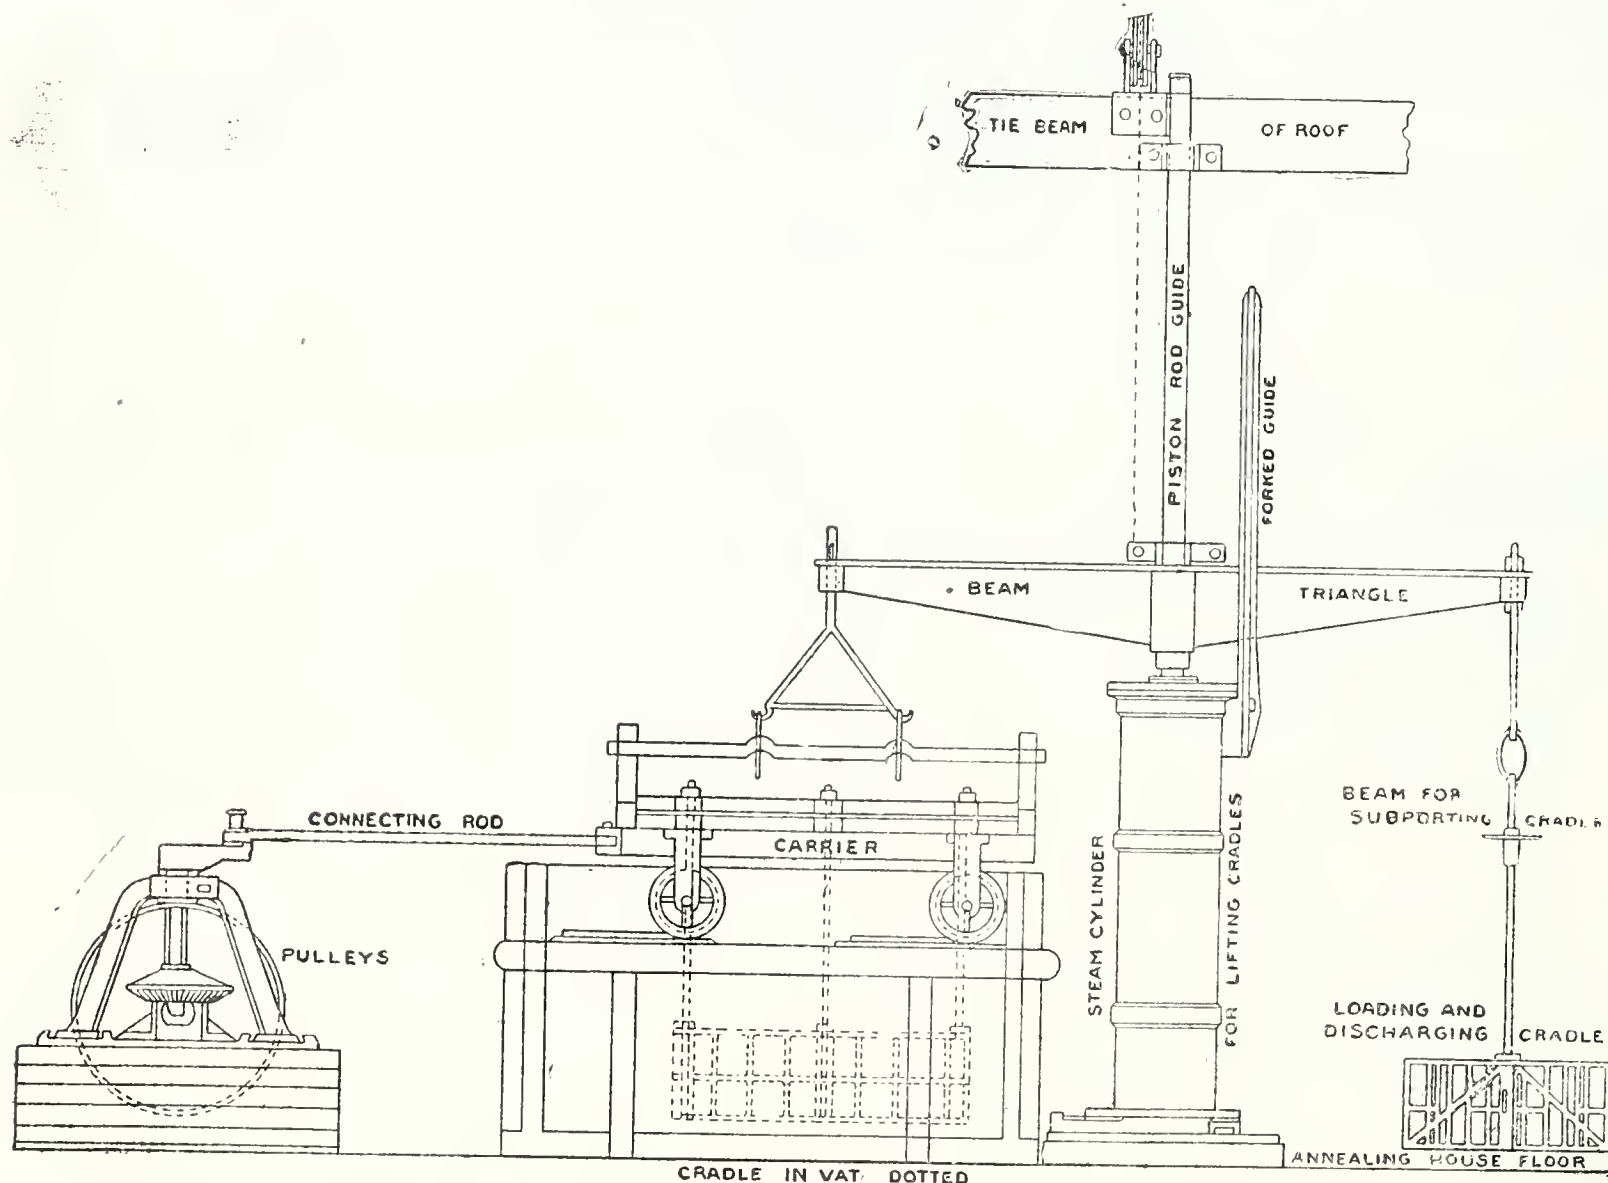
Hutchins Patent Horizontal Pickling Machine. Elevation
